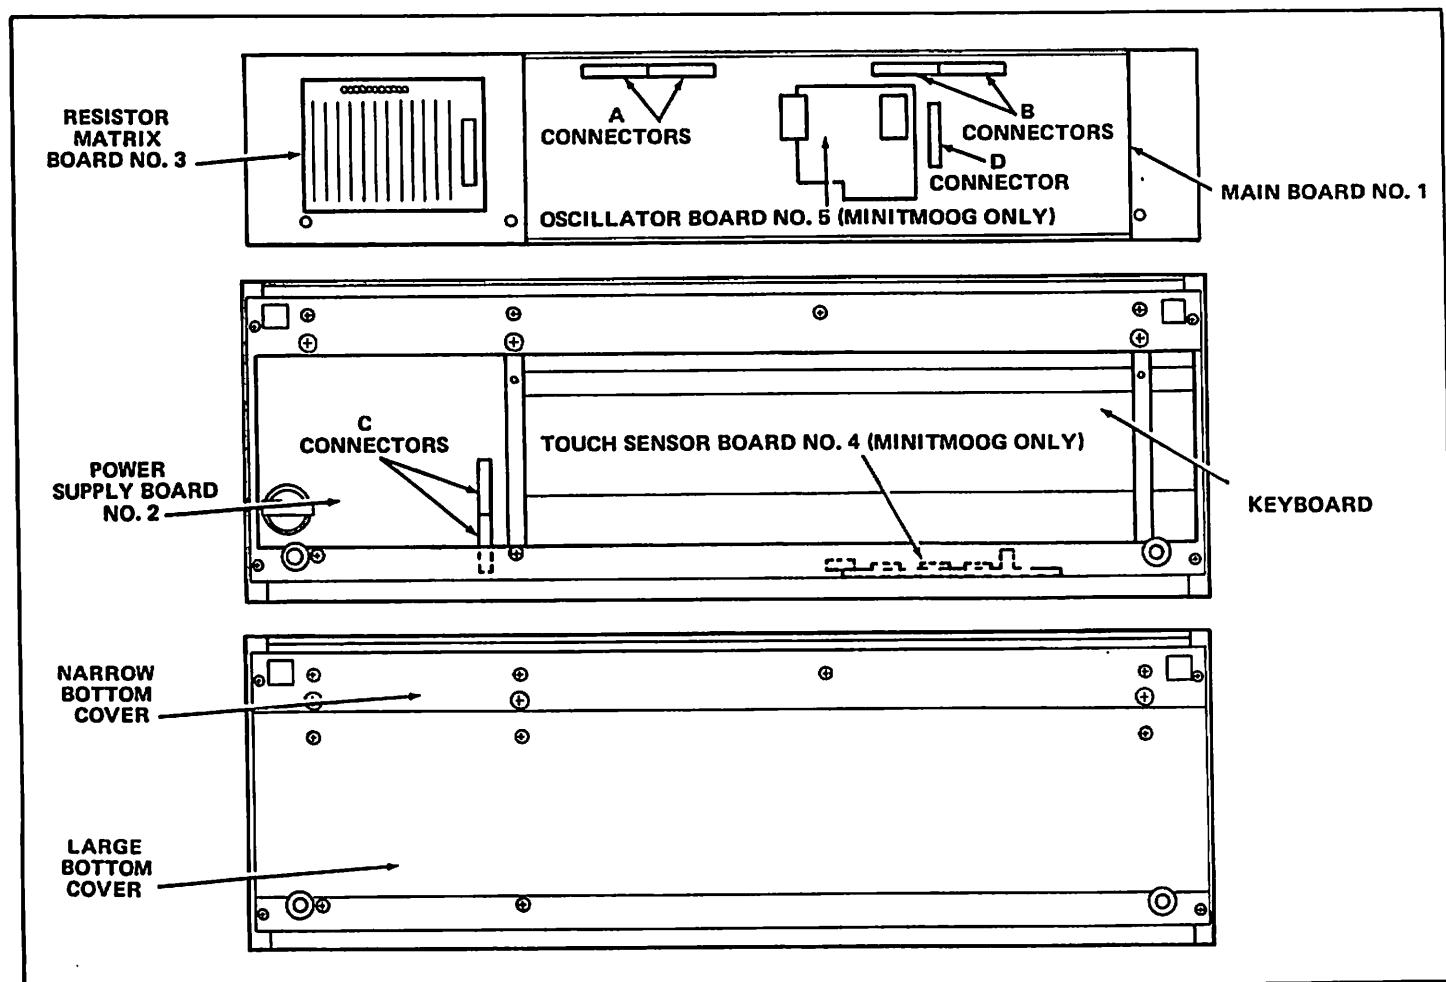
MINITMOOG COVER AND PRINTED CIRCUIT BOARD LOCATIONS (BOTTOM VIEWS)
